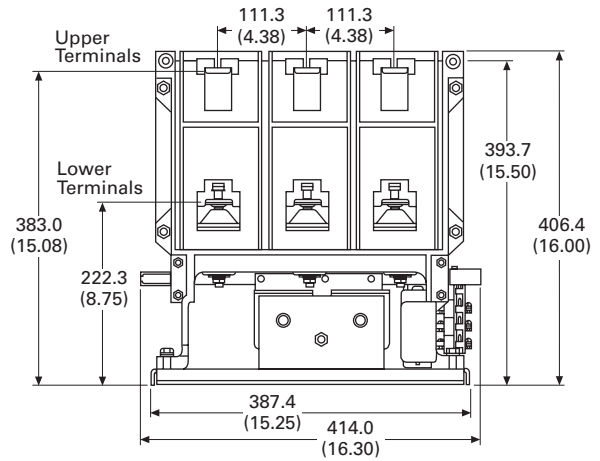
Base Plate Dimensions 160 – 400 Amperes
